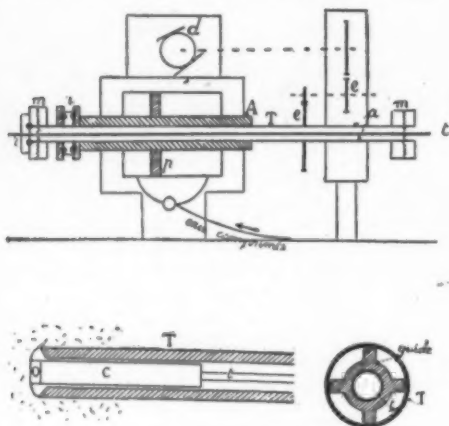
DIAGRAM AND DETAILS OF HORIZONTAL BORING MACHINE.
